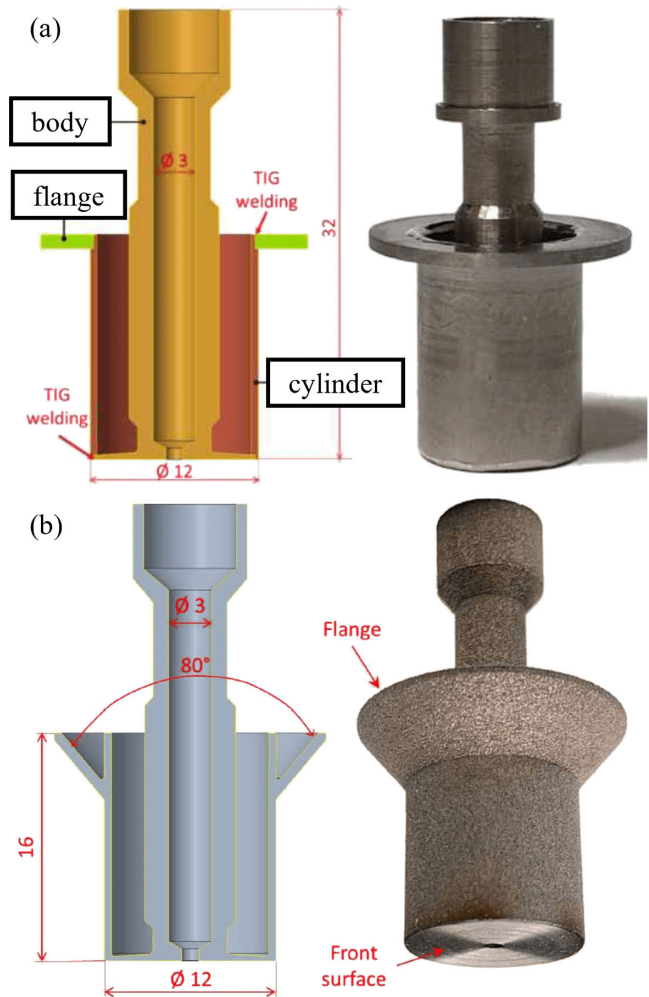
ISOL ion source tantalum cathodes manufactured by (a) TIG welding of machined tantalum pieces and (b) PBF-LB/M [170].
